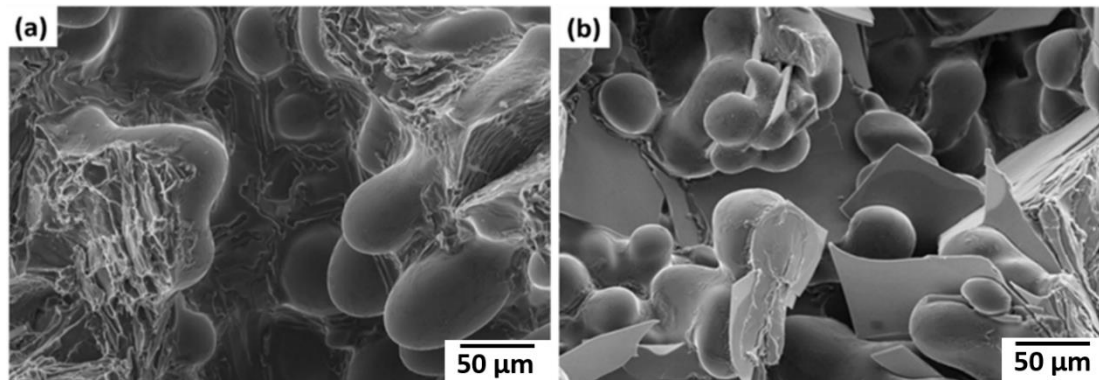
Fracture surface in the tensile samples of (a) Al-7Si, and (b) Al-7Si-2Fe alloys cast at 740°C.
